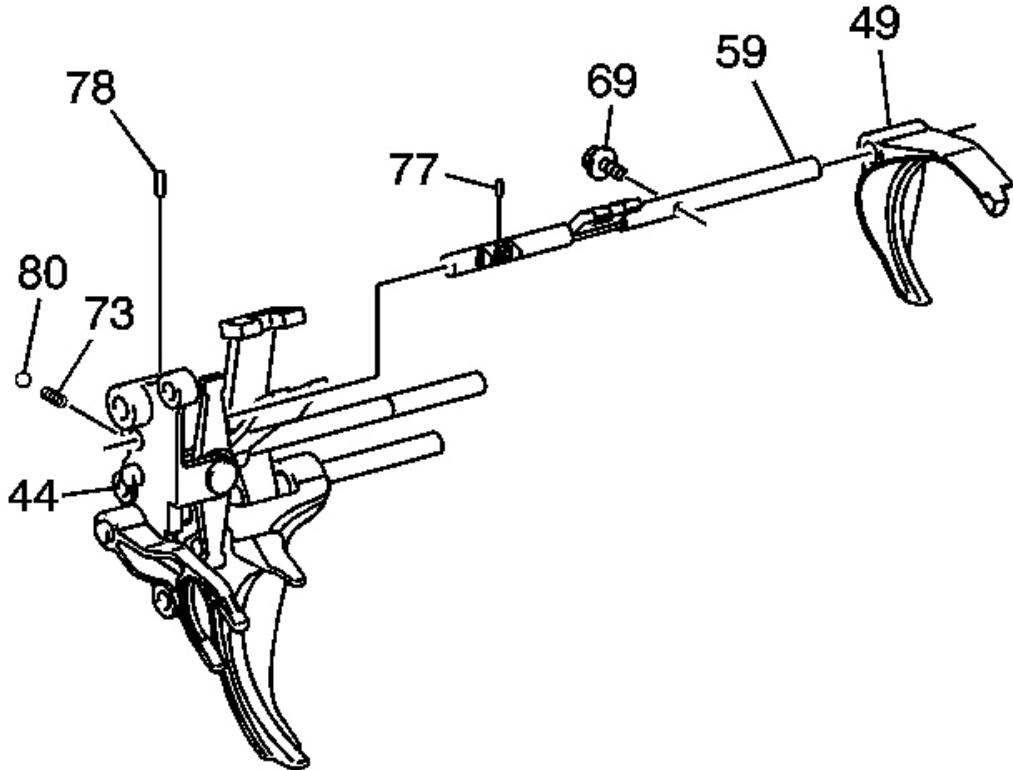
View Of 3rd/4th Shift Shaft & Components
